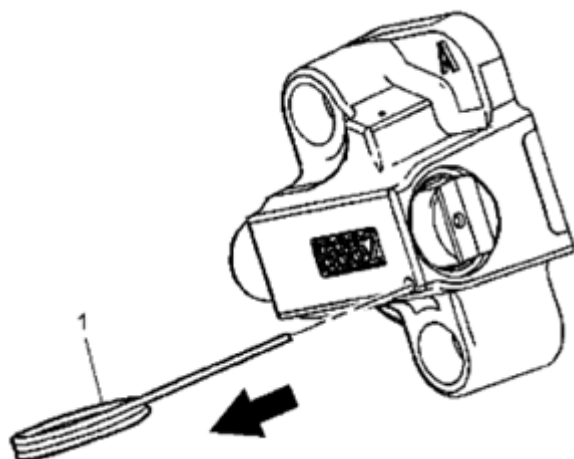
Identifying Timing Chain Tensioner Adjuster No. 1 Bolt
